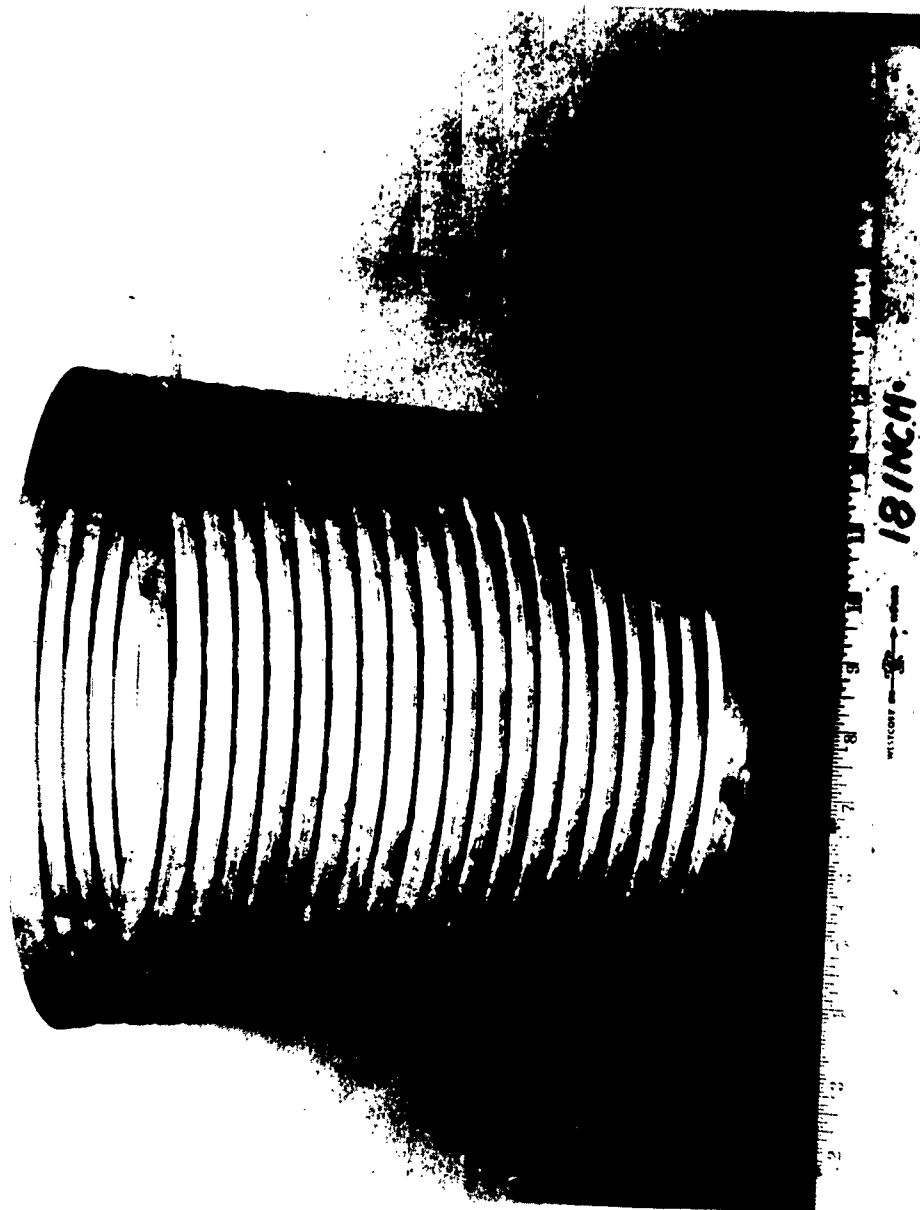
through 56 illustrate some of the applications developed by Pratt & Whitney Aircraft. Figure 56 illustrates another approach to sizing cylindrical parts to the final tolerances required.
